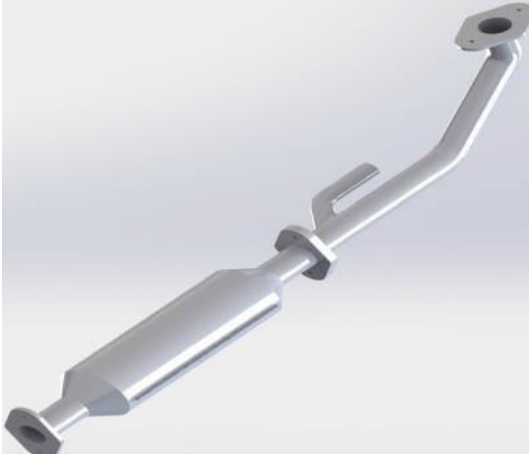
The complete catalytic converter assembly along with mounting and the exhaust line
